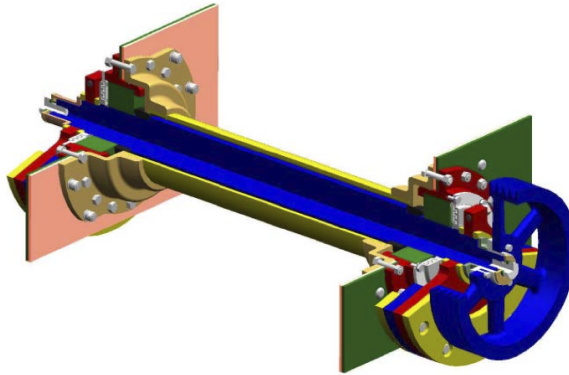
Shaft Assembly produced by W.S. Tyler. A typical design for a Rotational Imbalance Exciter
